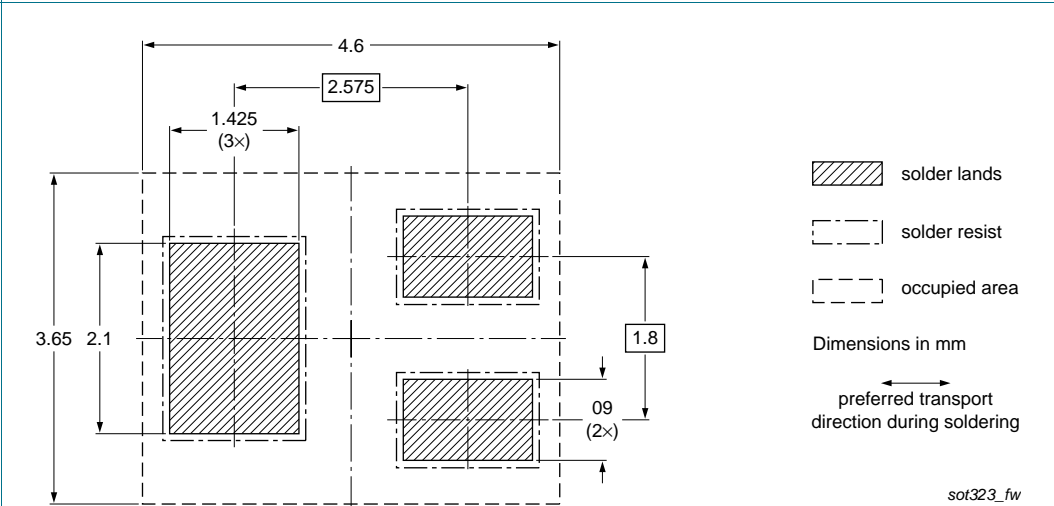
Wave soldering footprint PDTA124EU (SOT323/SC-70)
